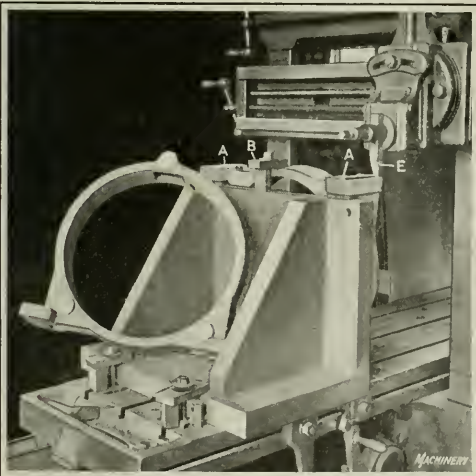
Planing Base Pads on Stock Reel Support for an Automatic Screw Machine
